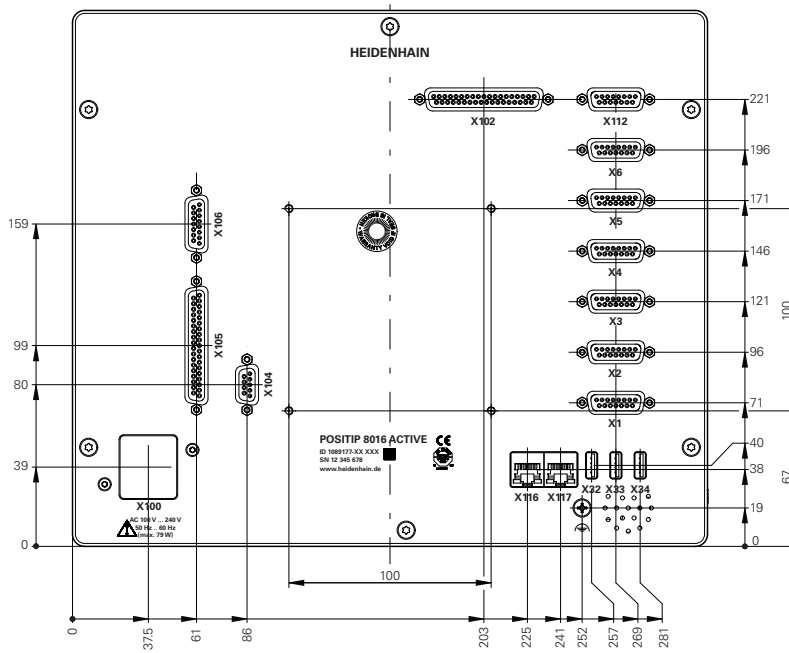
Dimensions of the rear panel for devices with ID 1089177-xx
